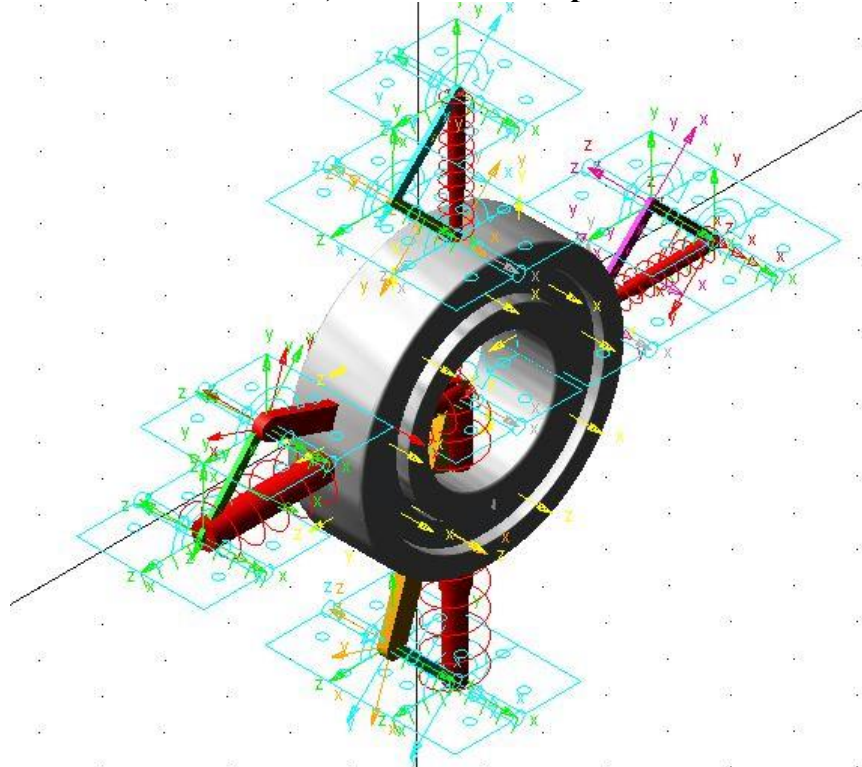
Model of deep groove ball bearing in MSC-ADAMS.
